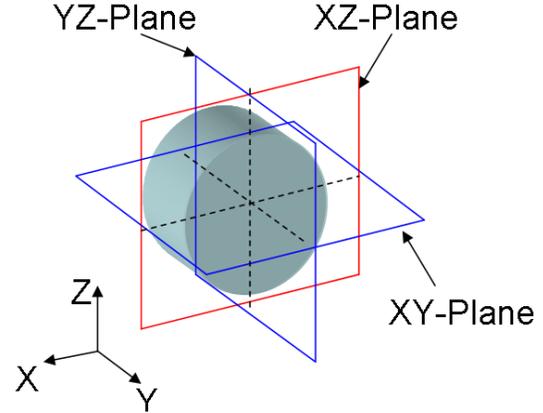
Shear planes of a bearing of the y-axis ball screw.
